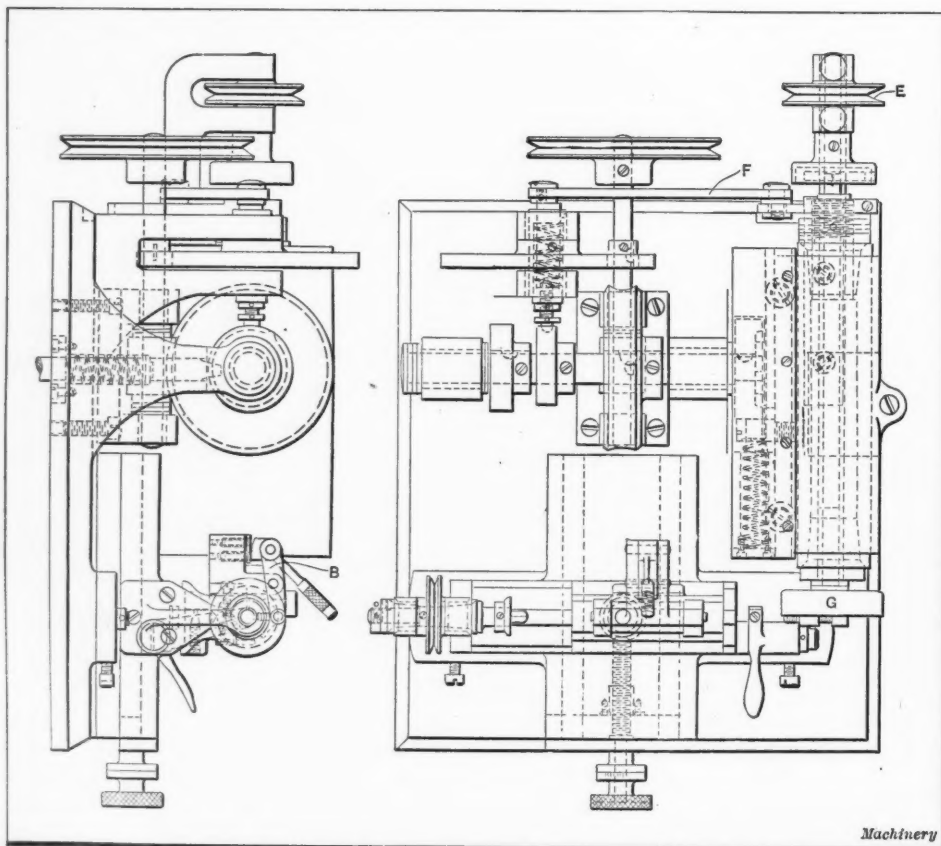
Construction of the McGinty Staff Cone Grinding and Polishing Machine shown in Fig. 35
